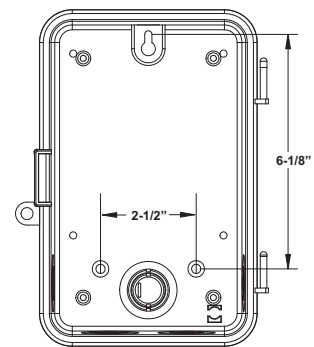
Rear View of Enclosure with mounting hole dimensions
